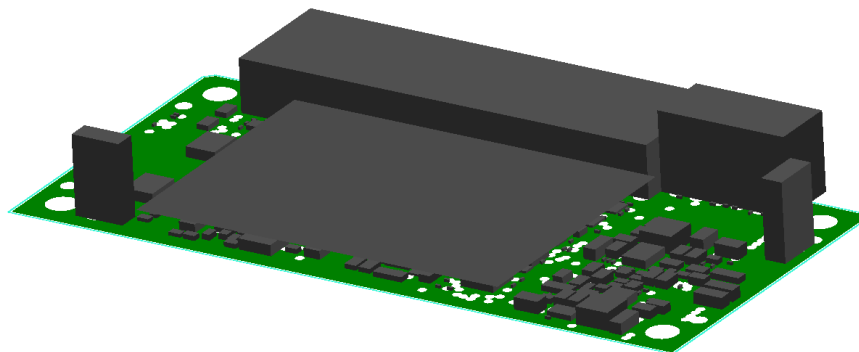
PCBA 3D Model with Shield Installed, Confirming no Mechanical Clearance Issues
